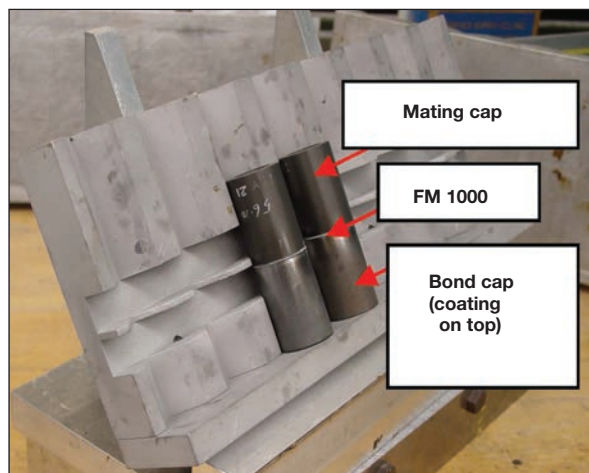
Gravity fixture to assemble and cure bond test samples. Picture does not show steel cylinders on top of assembled samples. One steel cylinder (1 in. diam. by 2 in. long) on top of each assembly is sufficient to bond FM1000 to samples
